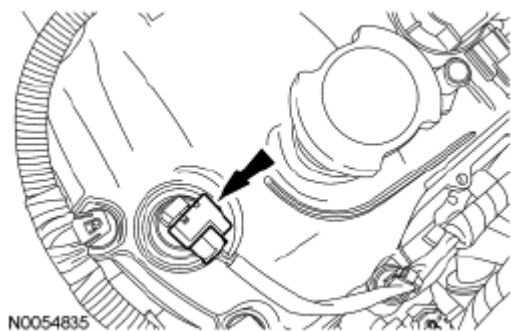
Locating LH VCT Solenoid Electrical Connector
